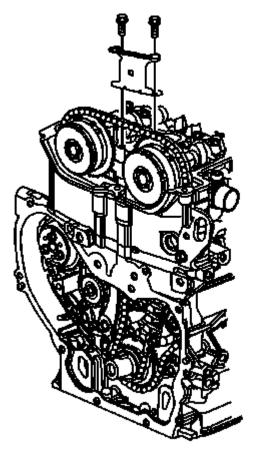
Upper Timing Chain Guide And Bolts Courtesy of GENERAL MOTORS COMPANY
